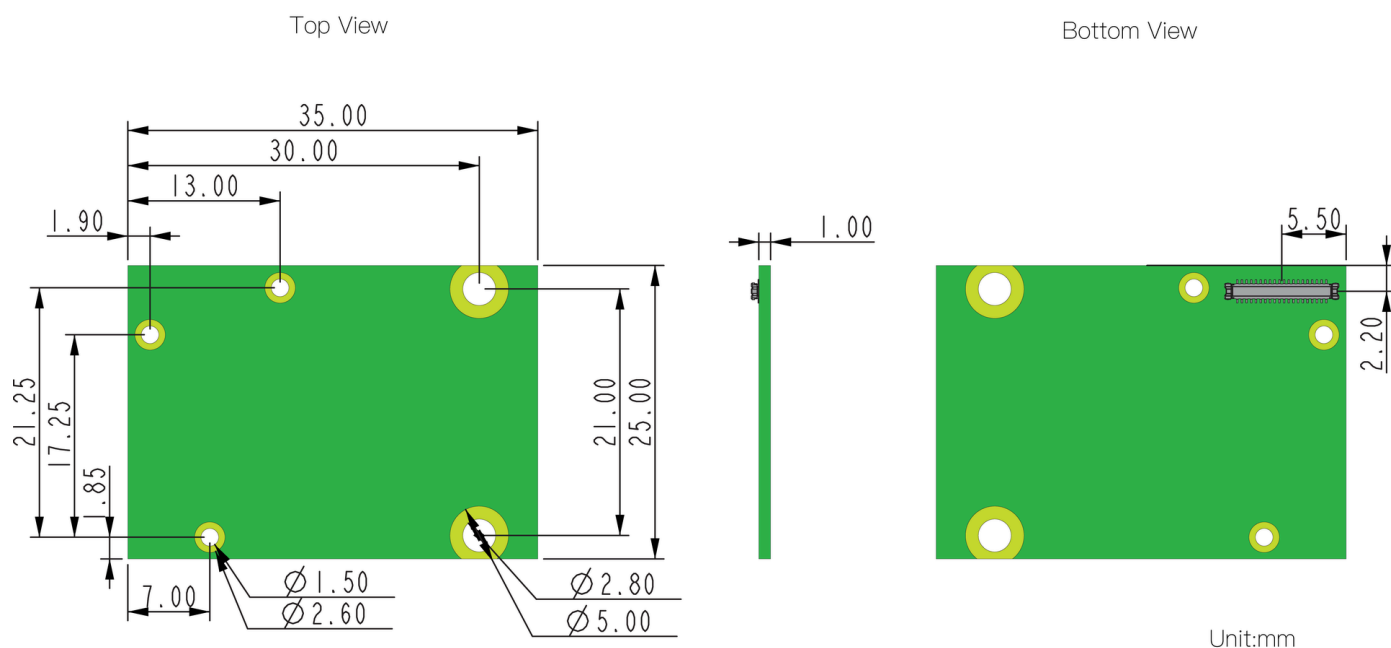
RAK17001 WisBlock H-Bridge Module Mechanic Drawing
